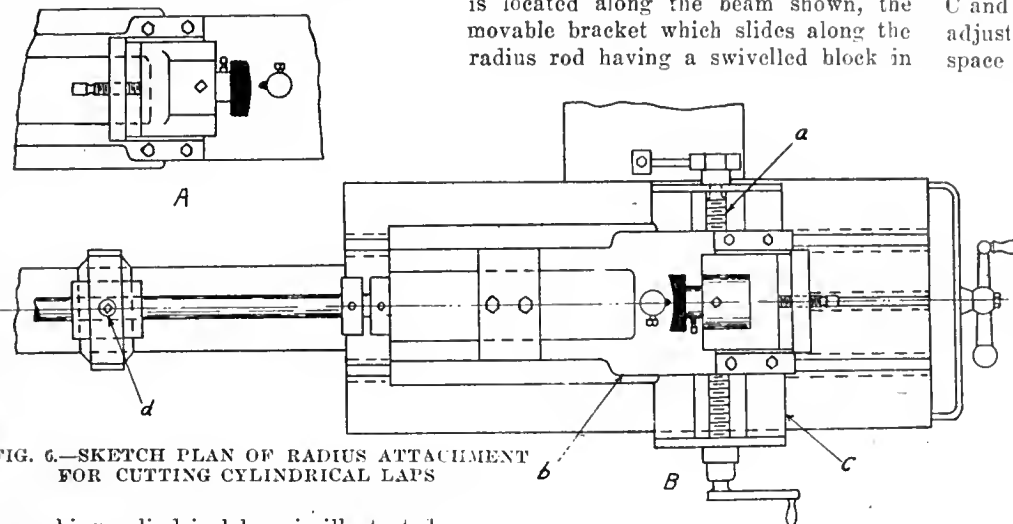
SKETCH PLAN OF RADIUS ATTACHMENT FOR CUTTING CYLINDRICAL LAPS
